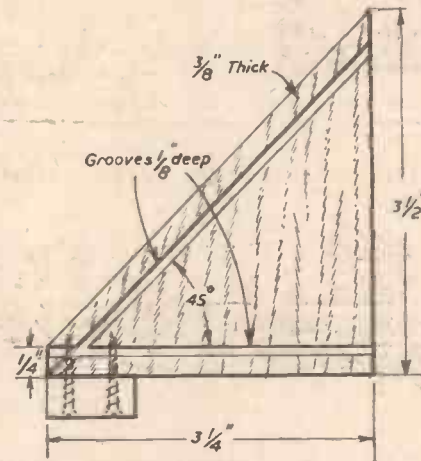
One of the triangular-shaped pieces for holding the mirror and glass.
